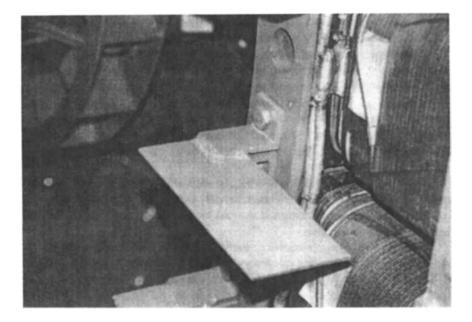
[R06] Arrangement similar to Figure 5-8, but in a smaller machine.
